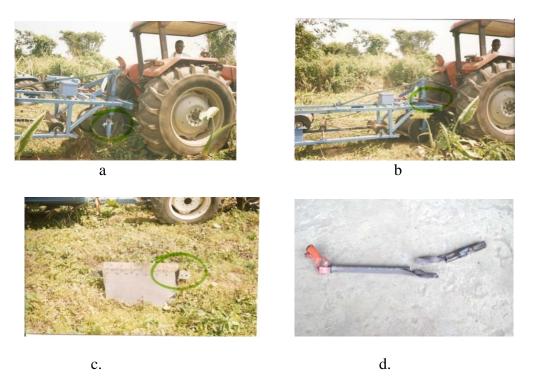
Pictures of damage to machine while in operation; a-spring; b-blade holder; c-Universal shaft coupling; d-universal shaft.
